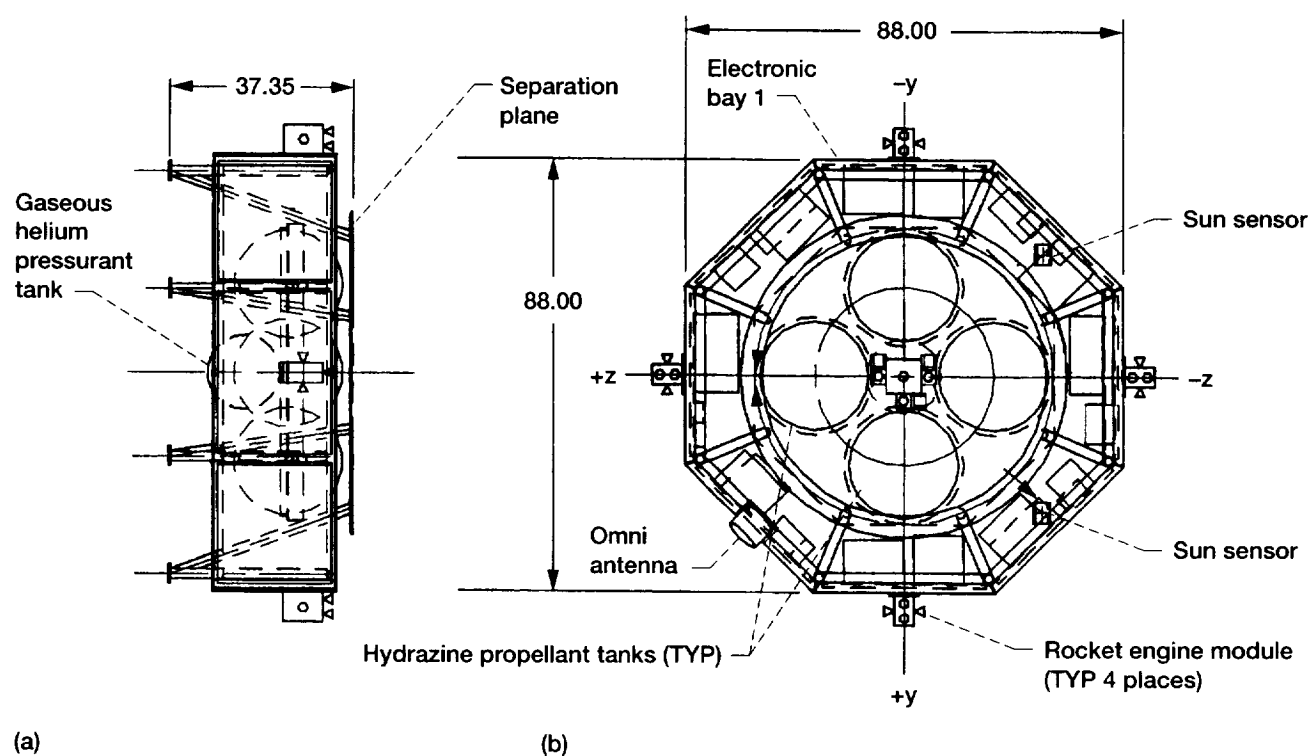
Electronics bay 1 module. (a) Side view. (b) Bottom view. Dimensions are in inches.
